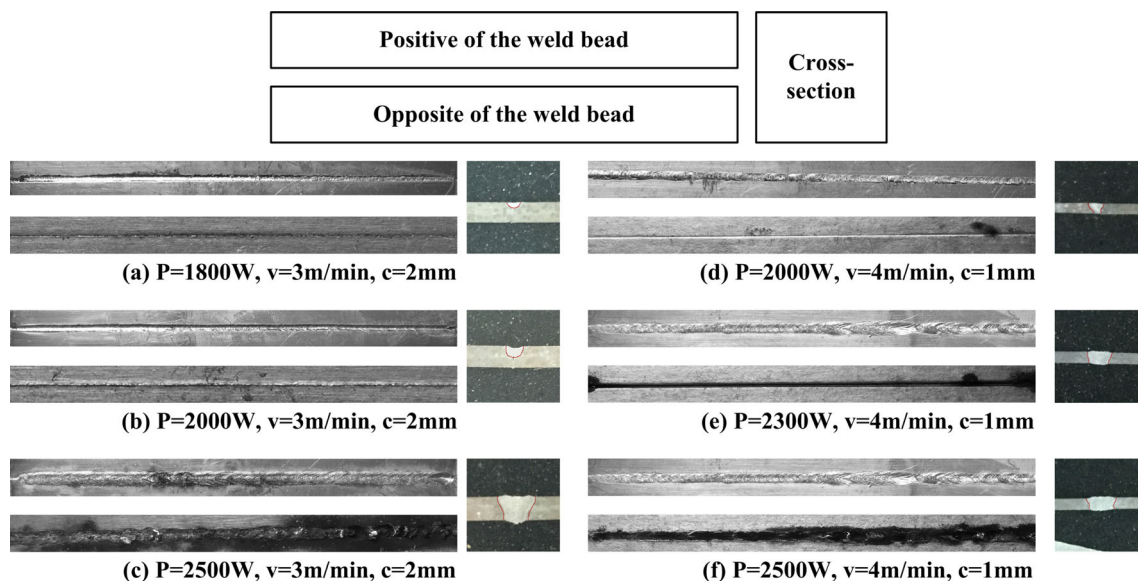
Surface morphologies and cross sections of the welded joint with welding parameters: a $P = 1800$ W, $v = 3$ m/min, and $c = 2$ mm; b $P = 2000$ W, $v = 3$ m/min, and $c = 2$ mm; c $P = 2500$ W, $v = 3$ m/min,
